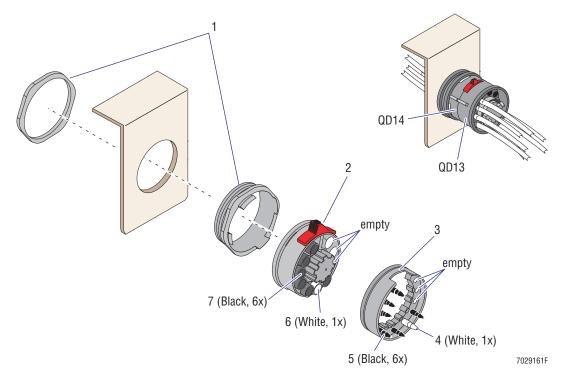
Quick Disconnects Below Upper Pneumatics Drawer (See Table 8.2-18)
